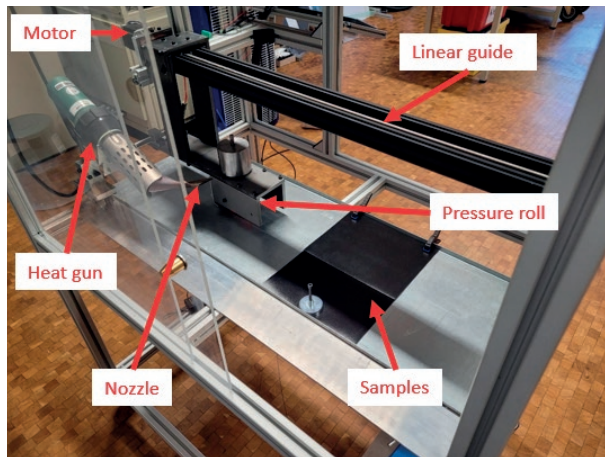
Laboratory hot air welding machine in the workshop of the University of Ansbach.
